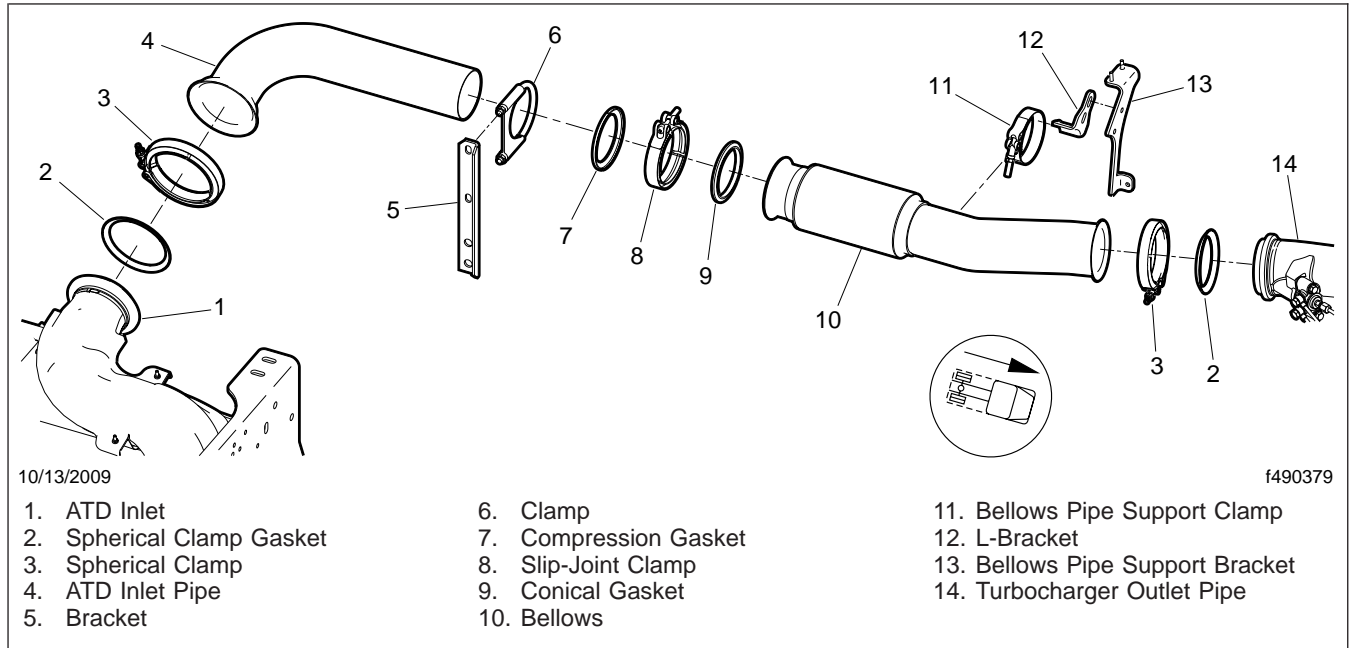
, Exhaust Bellows Installation (DD13 engine shown)
